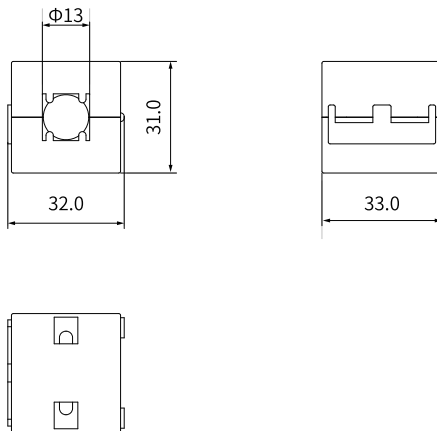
Ferrite clamp dimensions (unit: mm)
